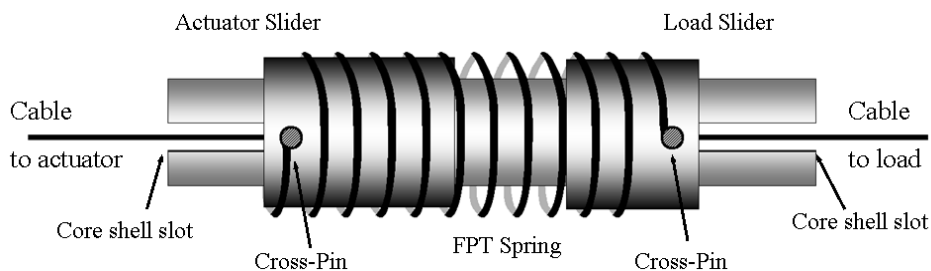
The final assembly of the FPT. The figure does not show the optical inner elements. Using this configuration, the FPT spring is free to slide and connected at each end to the actuator and load cables respectively. In addition each end of the spring is locked on to a linear outer slider. As the spring ends and the outer sliders move, changes occur in the inner optical components as described. These changes are measured using the output voltage of the respective phototransistors.
